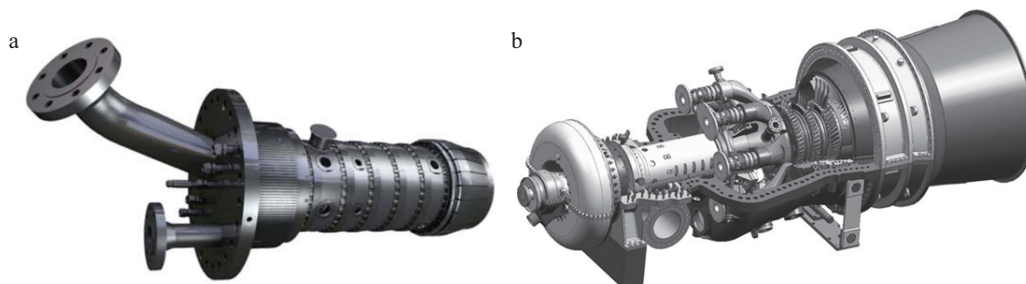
(a) Single OFT-900 reheat combustor; (b) Solid model of OFT-900, top half removed to show internal details
